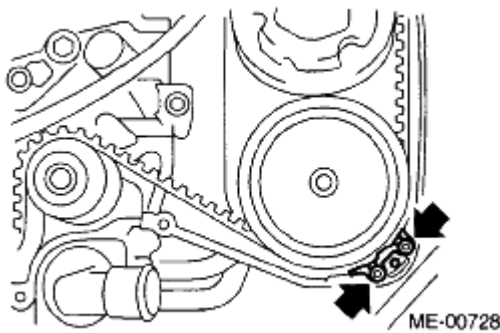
Identifying Timing Belt Guide Mounting Bolts (3 Of 4)
